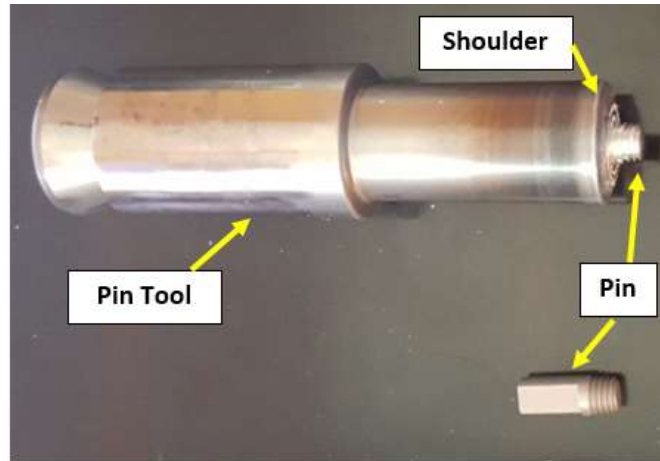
Pin Tool employed during FSW experiments (top) and interchangeable threaded pin (bottom).
